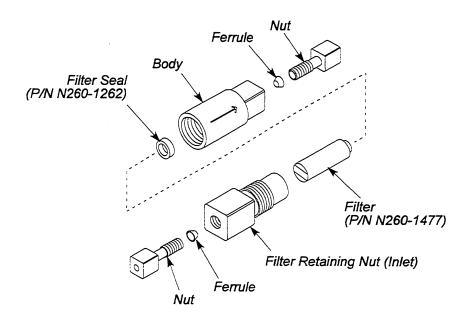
Exploded View of the Titanium In-line Solvent Filter.
